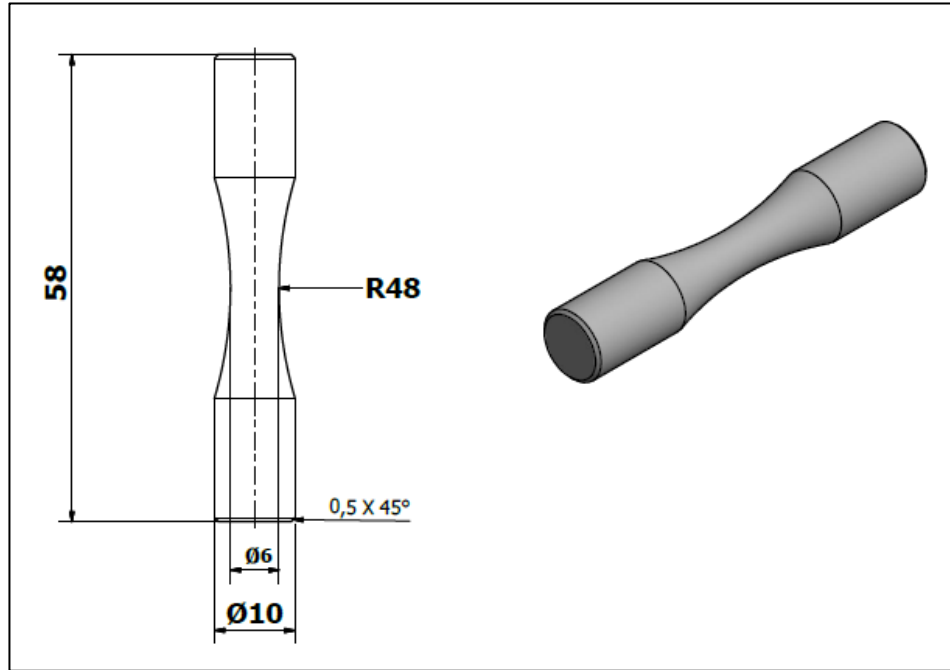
Fatigue specimen dimensions (all dimensions in mm).
